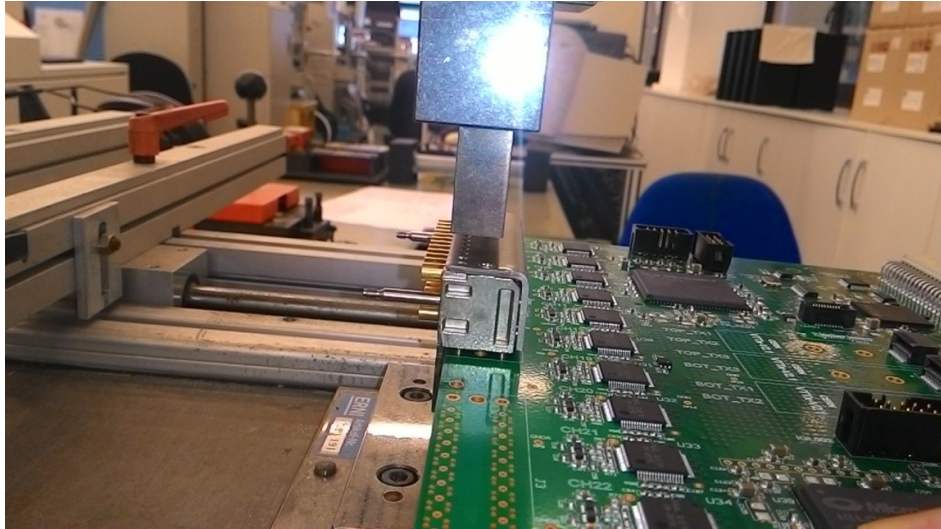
A Winchester connector getting ready to be hand-soldered on the QIE board.
